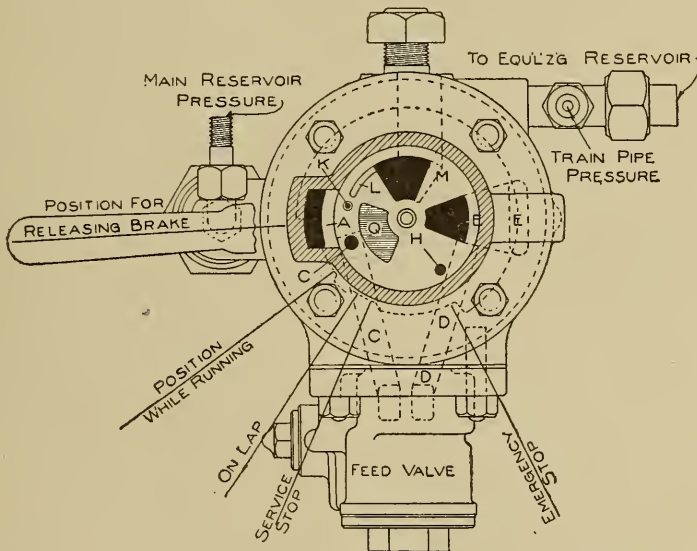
Section through Engineer's Brake-Valve.—Rotary Valve Removed, and Different Positions of Handle Shown.
